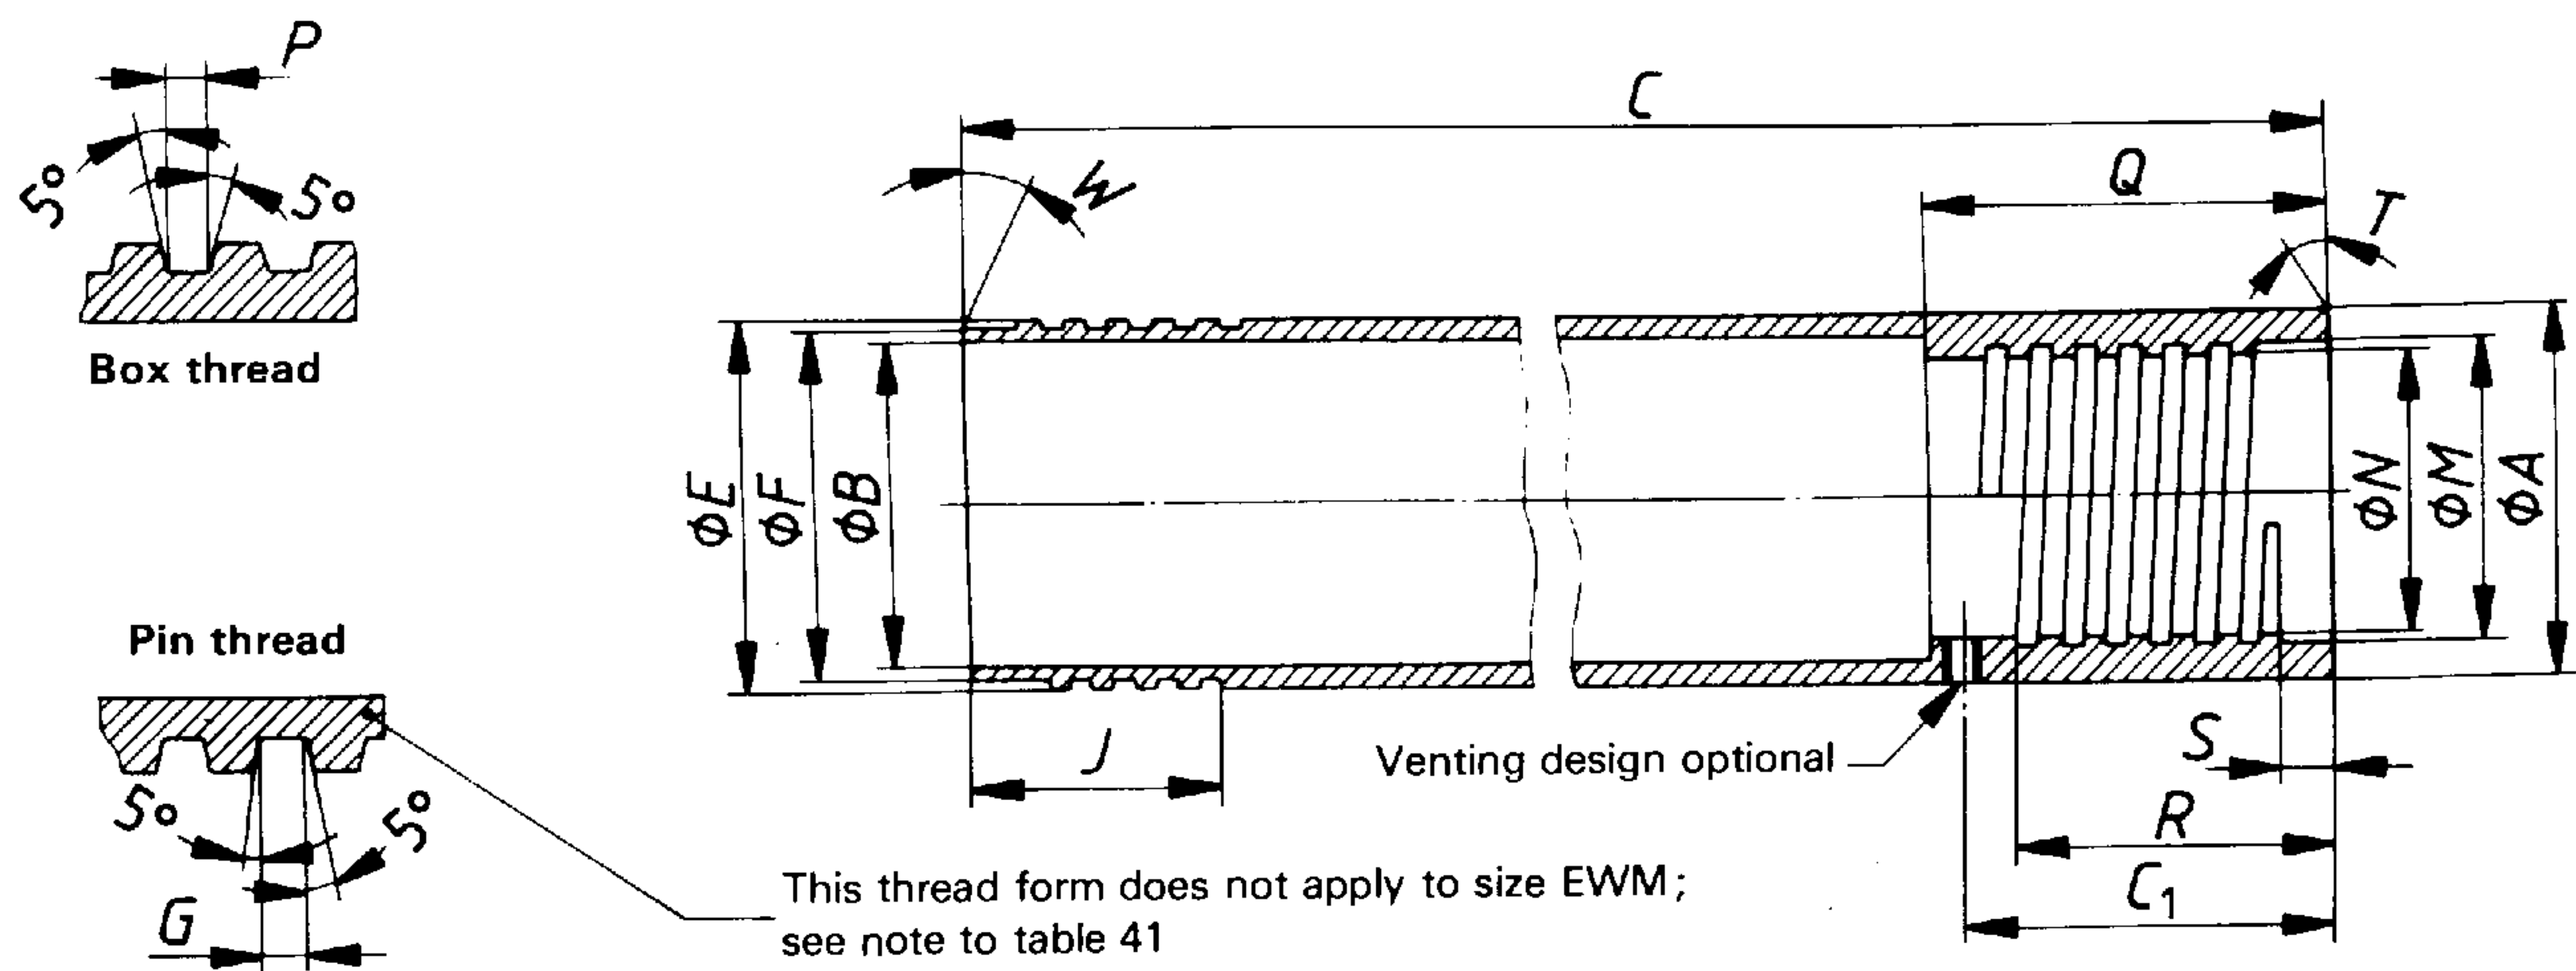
"WM" design double-tube core barrel — Inner tube (see table 41)
